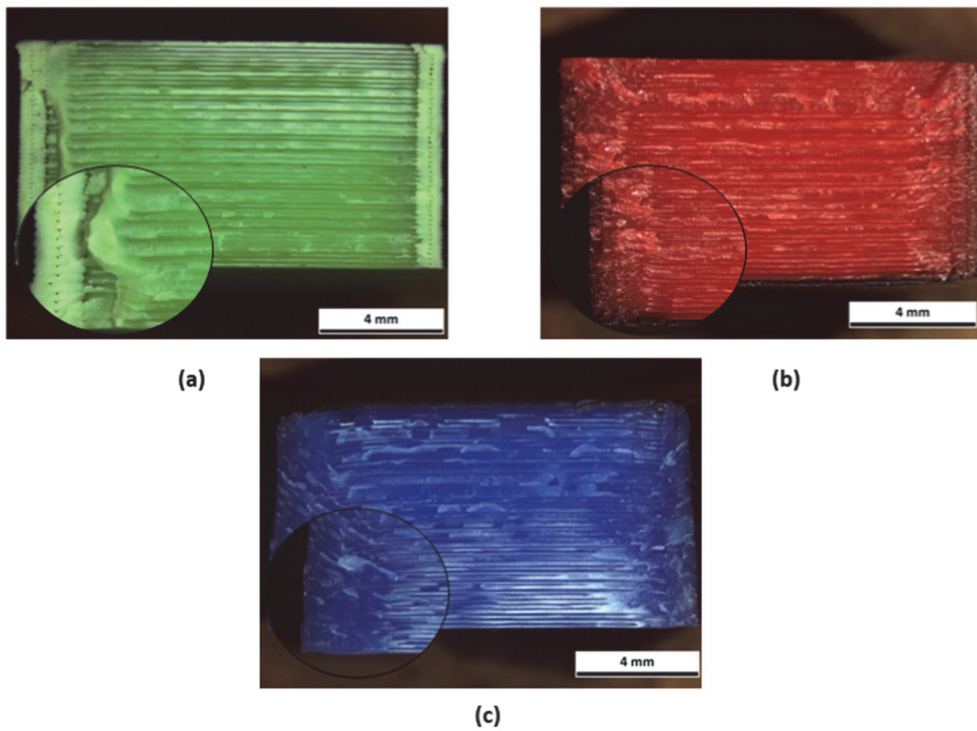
Fracture surfaces of raster angle 0° orientation specimens: a) ABS; b) PETG; c) PLA.
